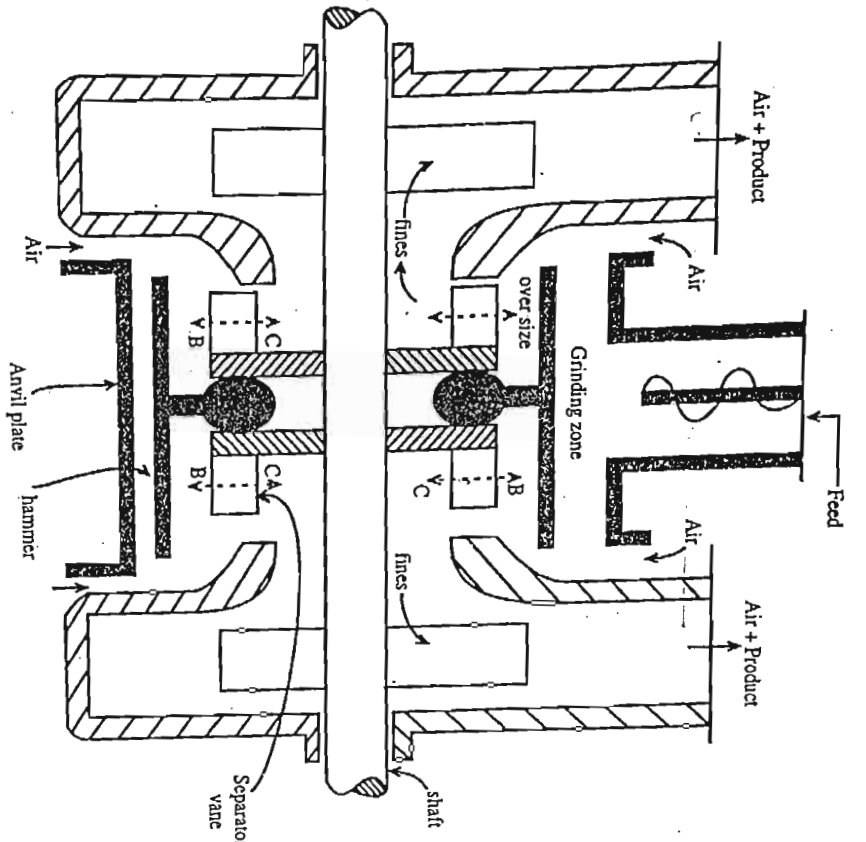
Classifying Hammer Mill (Miko-Atomiser)
